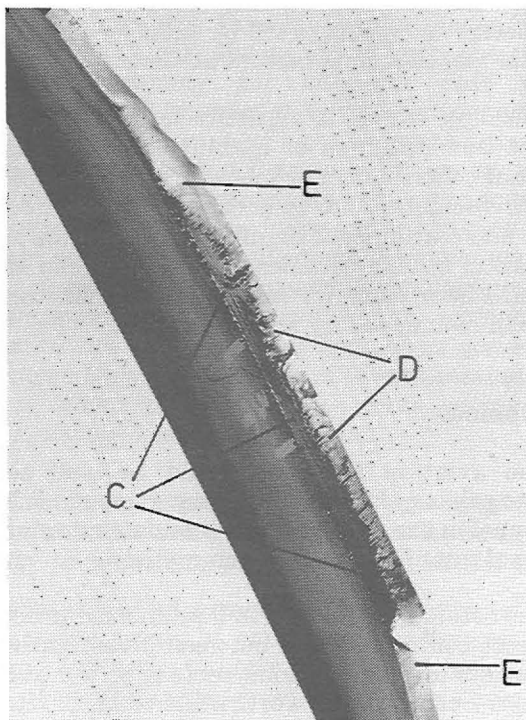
Fatigue propagation from lack of fusion in weld.
